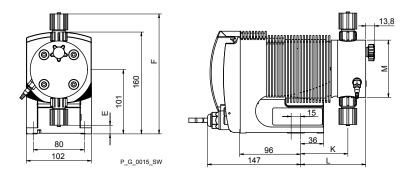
Dimensional drawing gamma/ L, material versions NPE, NPB (with bleed valve) - dimensions in mm
